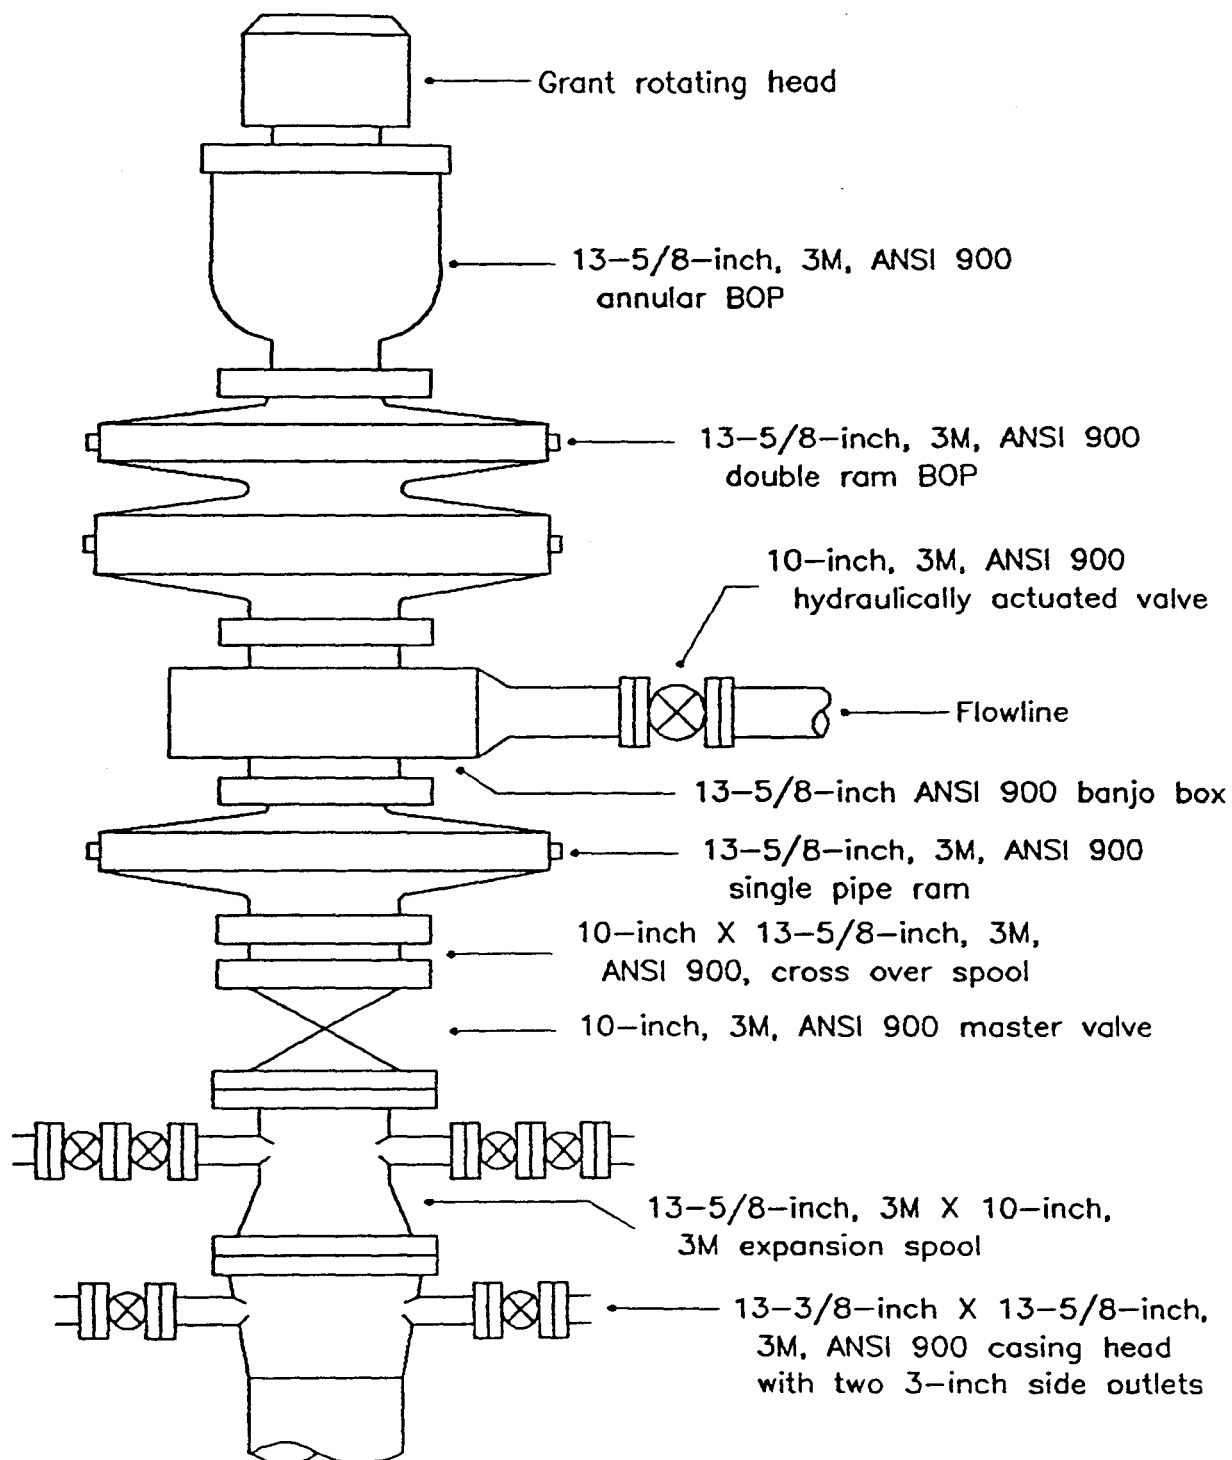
BOP for use on 13-3/8-inch casing string – air drilling below 4,000'.
